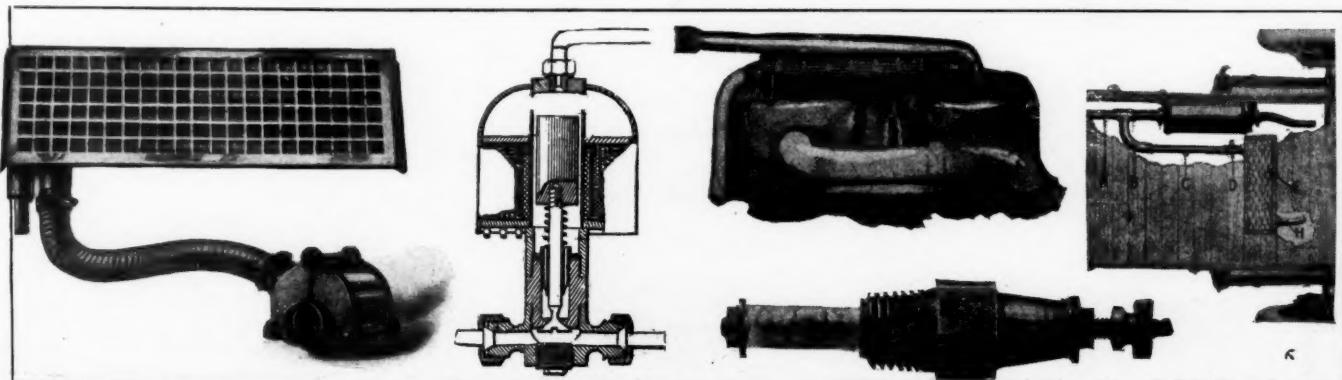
Four-in-One auto heater. Fig. 2—Duelec electric primer. Fig. 3—Consolidated motor heater. Fig. 4—Stalit heating plug. Fig. 5—Garrison car heater
